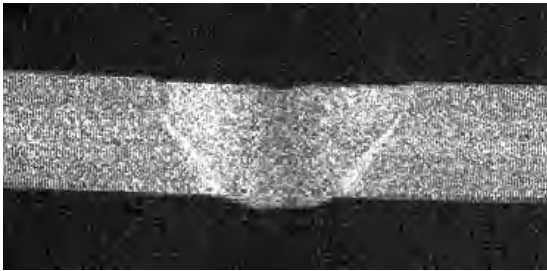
Automobile blank welding in aluminum alloy, 1.25 mm thick, power used 7.5 kW, welding speed 18 m.min⁻¹ (*igm Steigerwald Strahltechnik document*)
